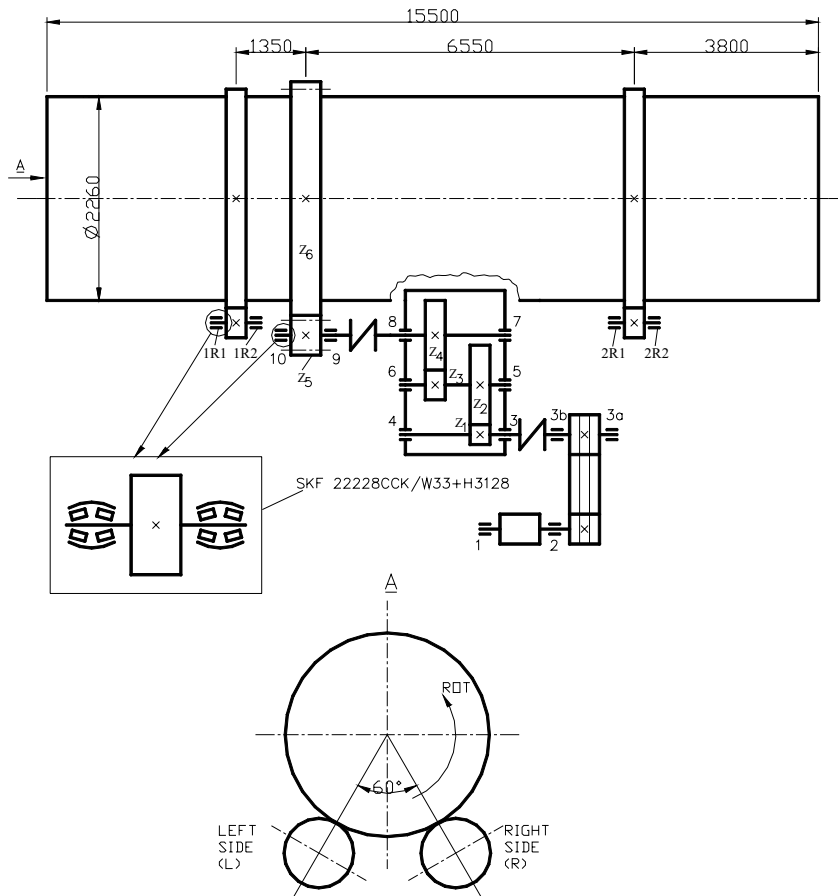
The Dryer with cylindrical shell and supplementary mechanisms: 1,2 – electric motor bearings; 3a, 3b – belt drive bearings; 3,4,5,6,7,8 – gearing box shafts; z_1, z_2, z_3, z_4 – teeth numbers of gears; 9, 10 – shell gear drive z_5 bearings; 1R1, 1R2, 2R1, 2R2 – bearings of right dryer side cylinders; ROT – shell rotation direction
